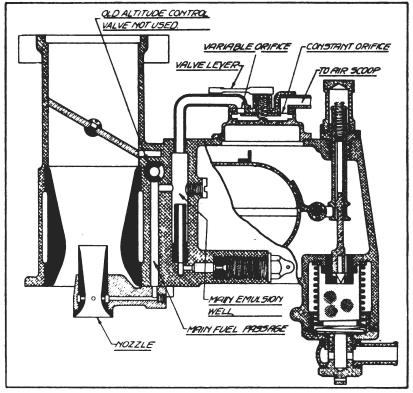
Type "G" control fitted to Packard carburetor on Packard Model 1A-744 Aviation engine.
